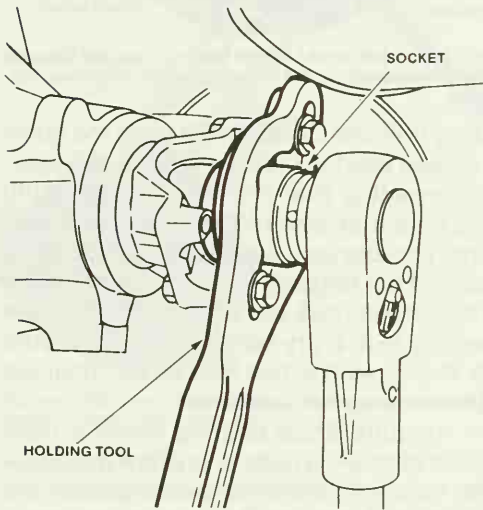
A holding tool prevents the companion flange from rotating as the pinion nut is removed. (American Motors Corporation)
